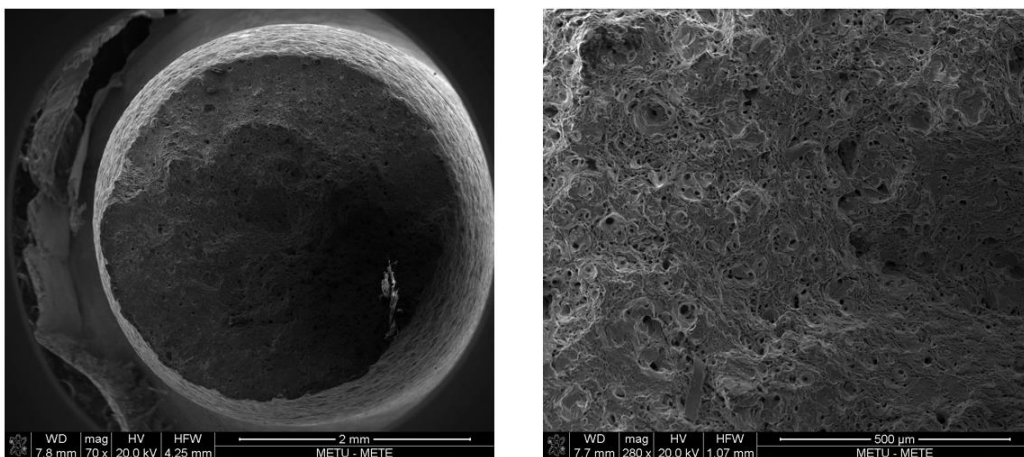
Fracture surface of specimen 3 obtained from production 10
